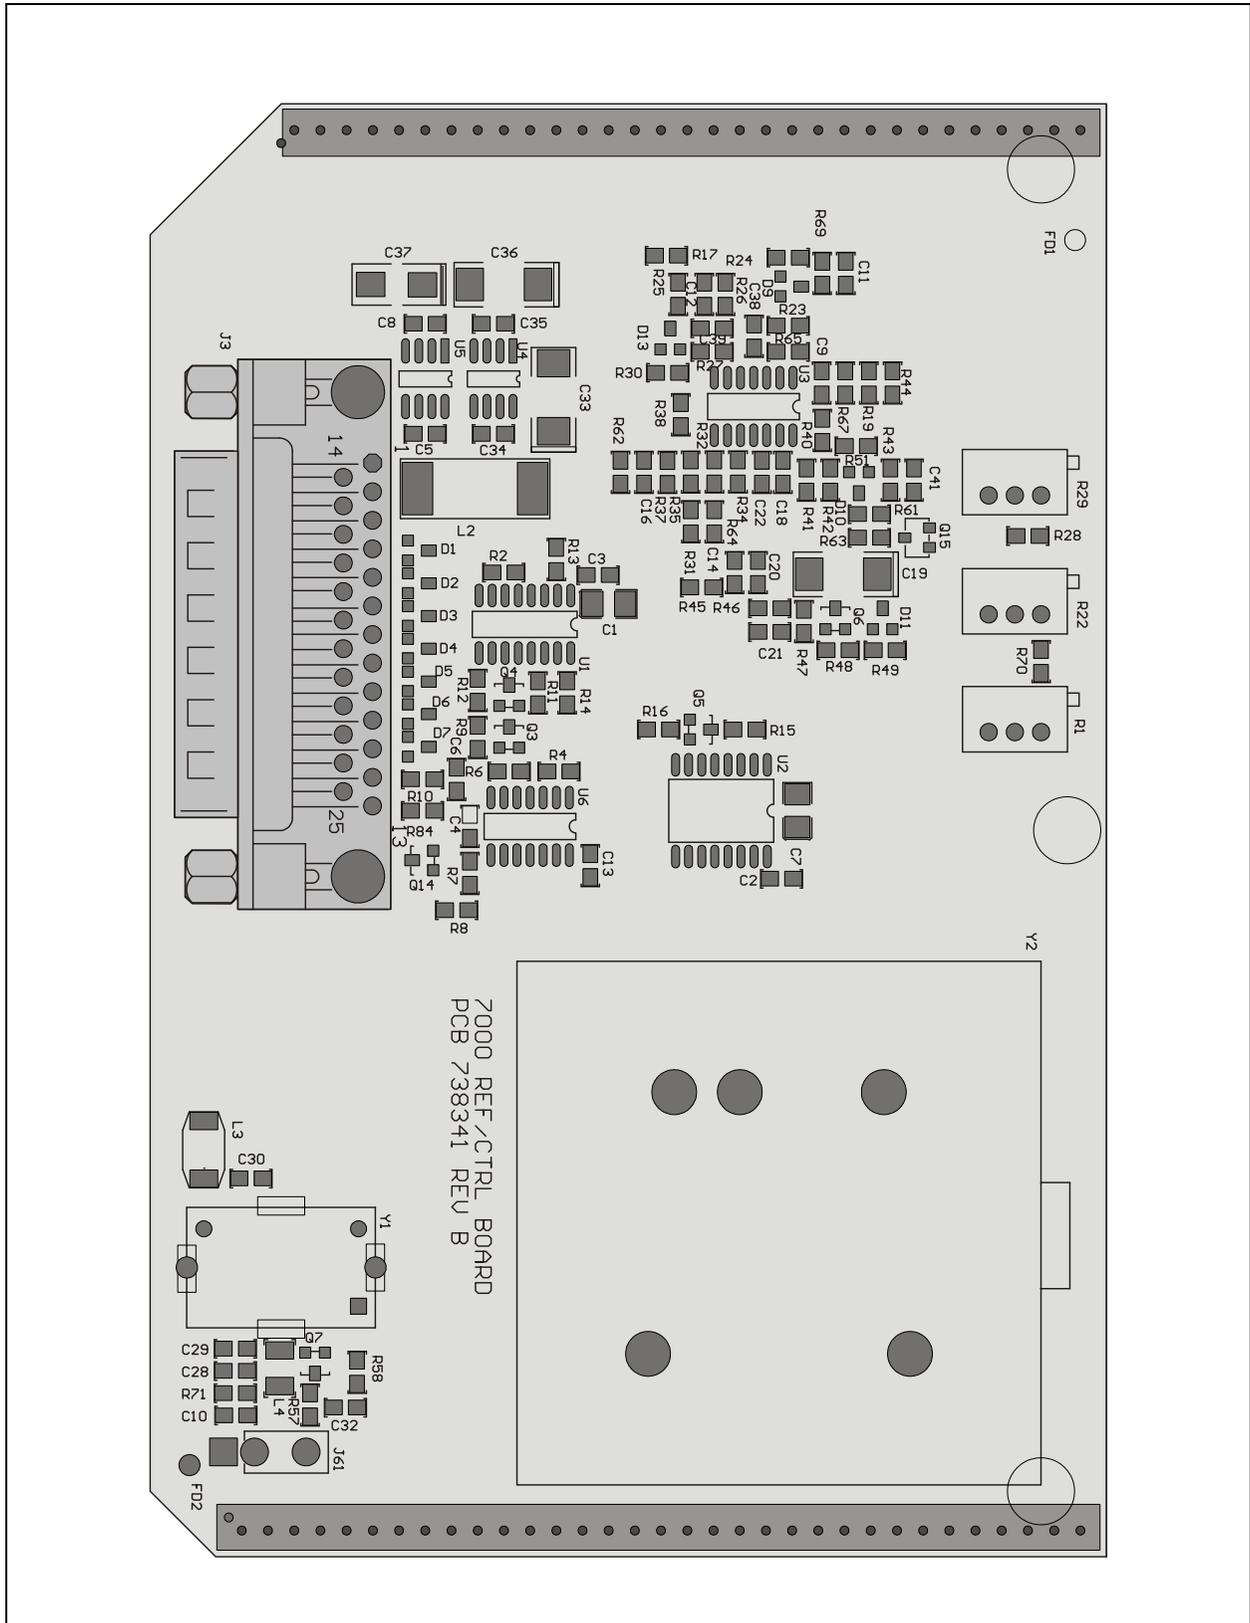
High Stability Fast ALC Option Component Locations (738341 Rev. B)
